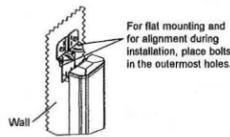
DB5094-AZ Bolt Placement for Mounting Flat Against the Wall.
